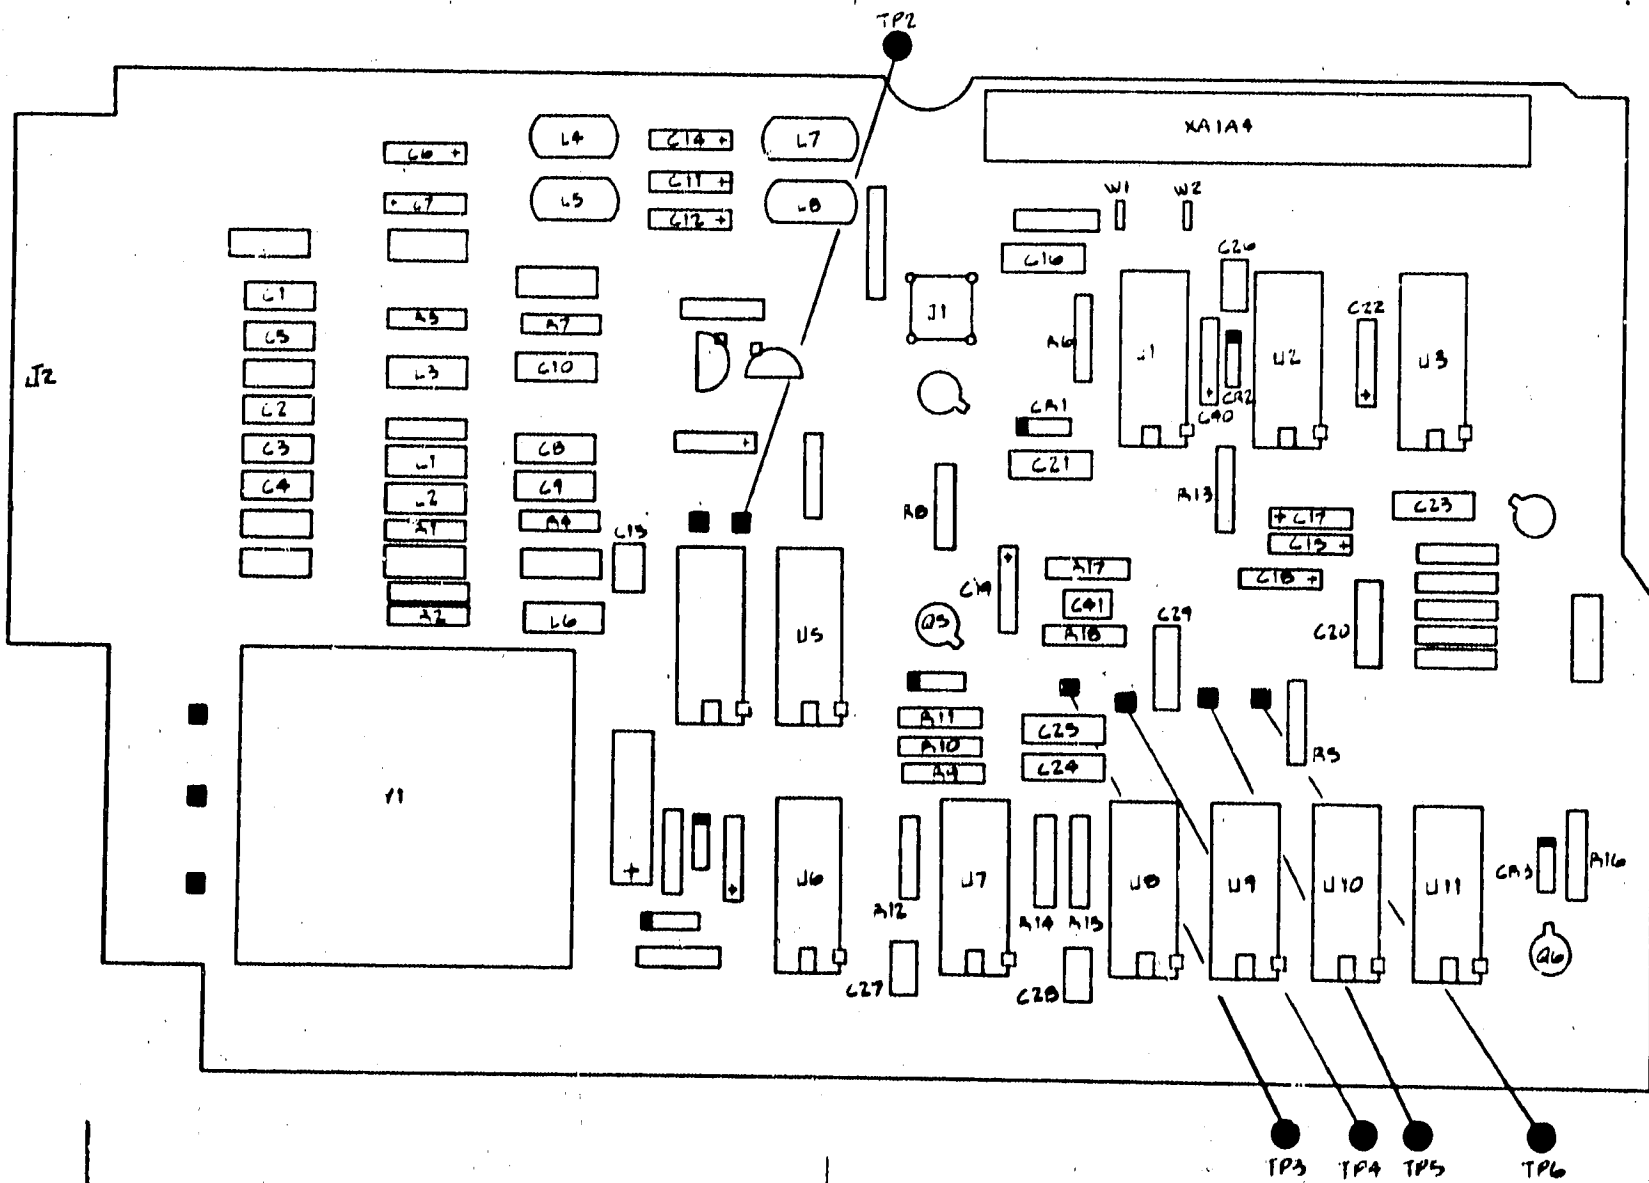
P/O A1A3 Time Base Board Assembly (Time Base) Component Locations
